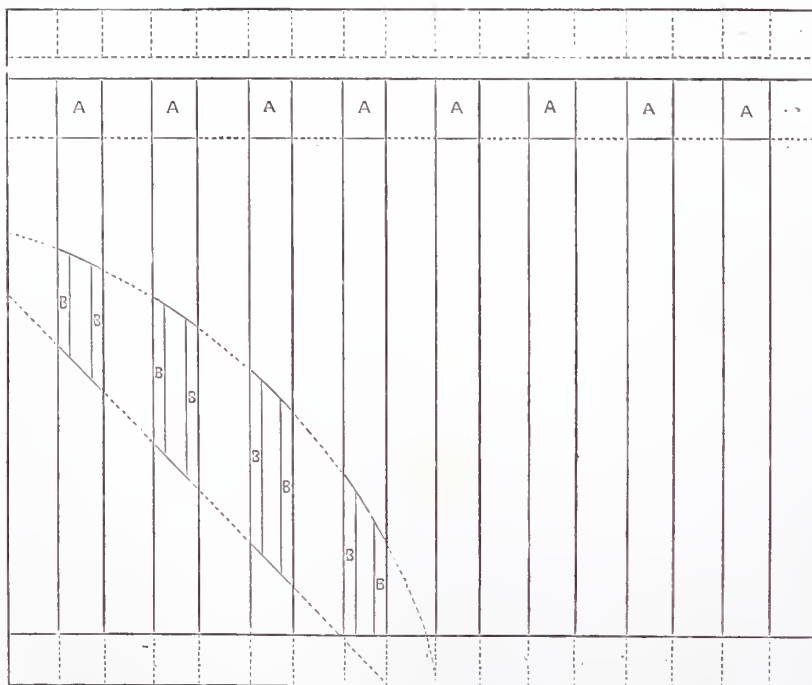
Back View of Back—A, Blocks behind Wrest Plank. B, Blocks behind Bent Sides. (Scale, 1 inch to 1 foot.)
